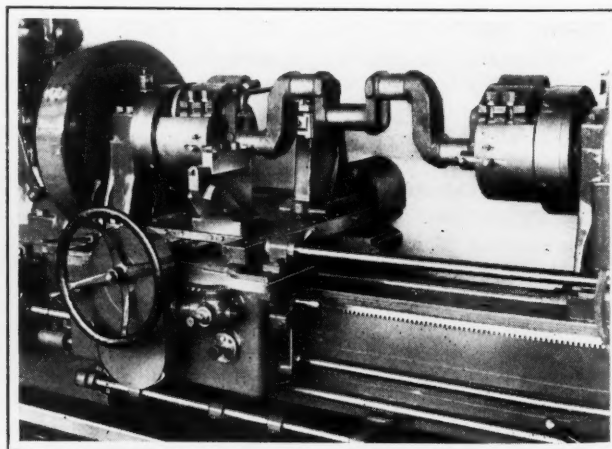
Turning Pin No. 4 of a Heavy Crankshaft in the Universal Type of Lathe
